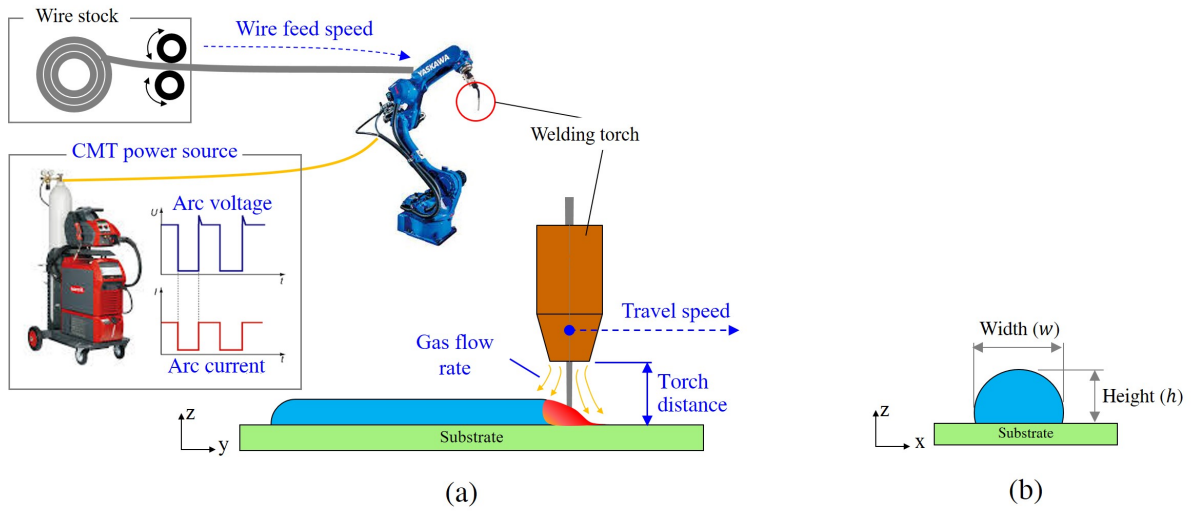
(a) Definition of welding parameters [121], (b) weld bead structure [89, 138, 137]
